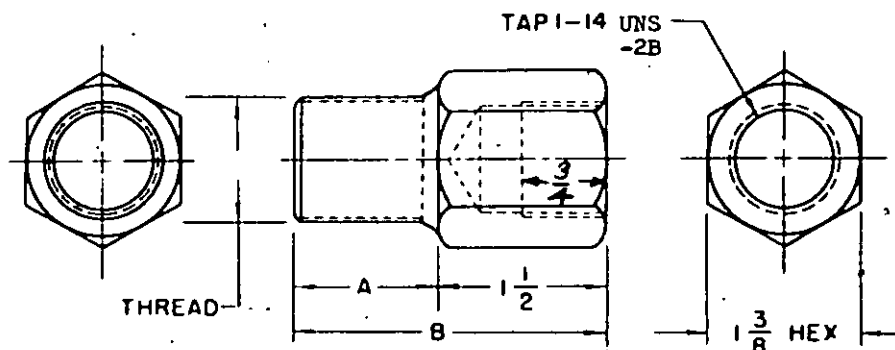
Type XIII, class 1, style B puller adapter, mechanical, gear and bearing, male and female thread with 1 - 14 UNS-2B tapped hole.
